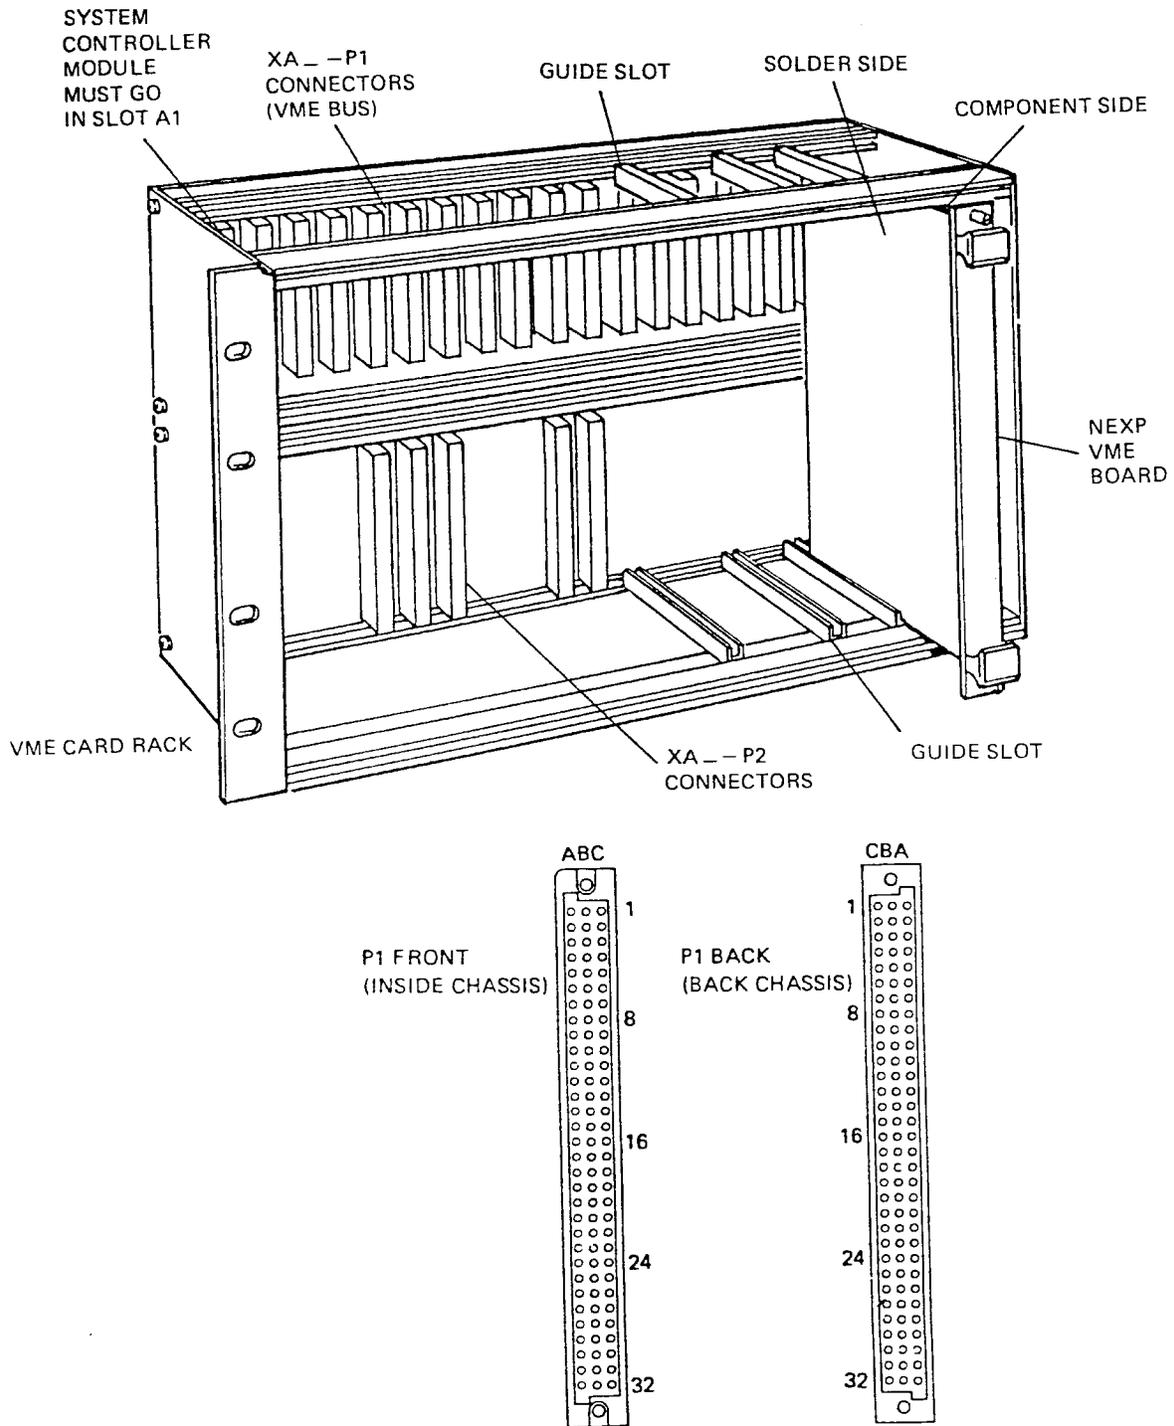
ACU VMEbus Chassis and Connector Pin Assignments (Sheet 2)
